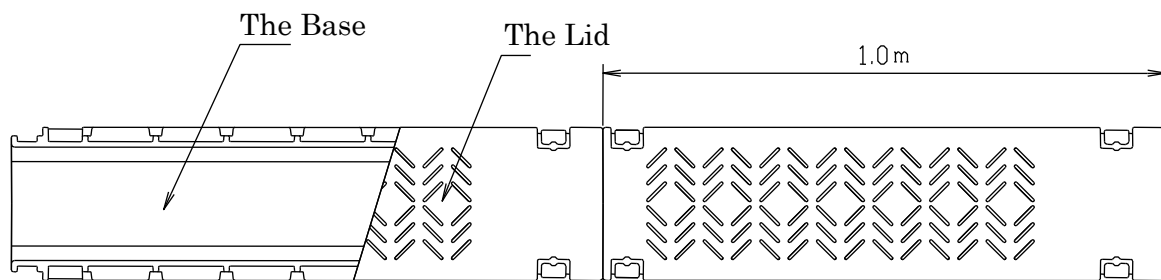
Structure (Assembly drawing of 90, 135, 150, 200, 300)
